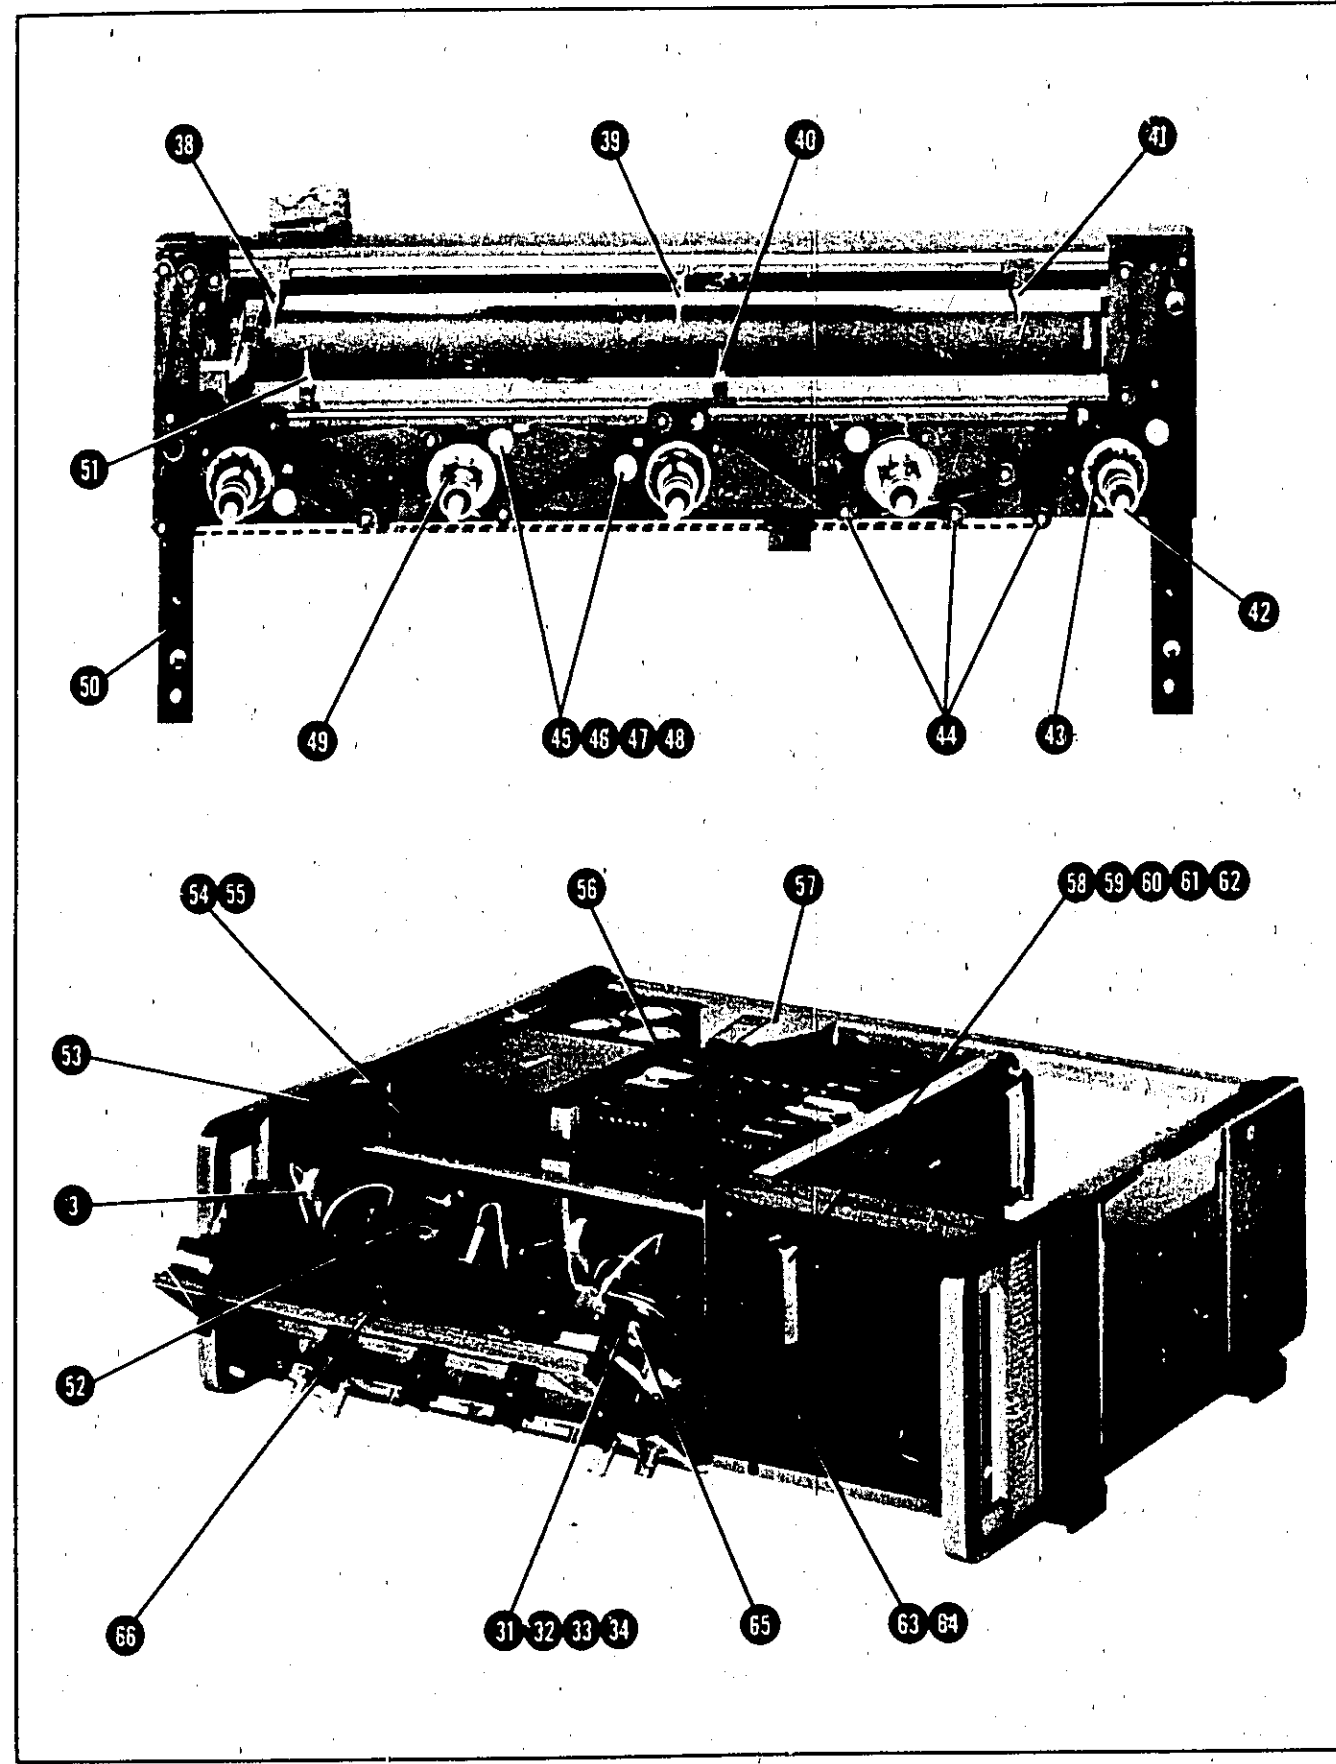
Front Panel Assembly, Parts Locations (3 of 4)
